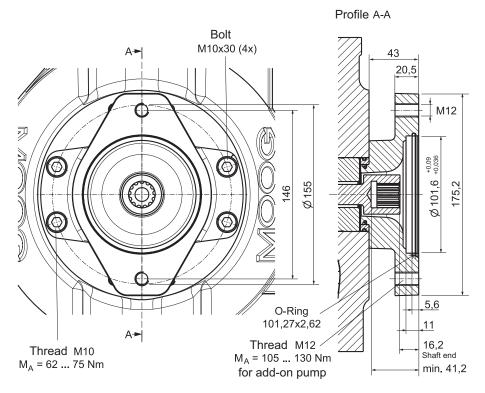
Adapter flange SAE-B with 13-tooth shaft
